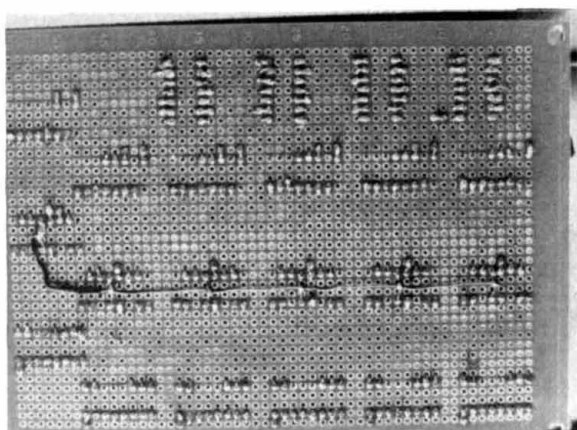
Photo E. Rear view of bottom board shows closeness of solder points and bus for latches that transfer pulse feed.
